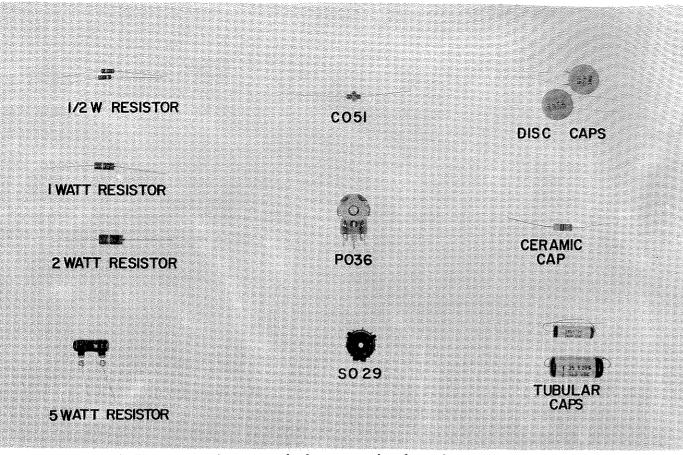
C. The parts used in wiring the front circuit board are shown above and listed below.
